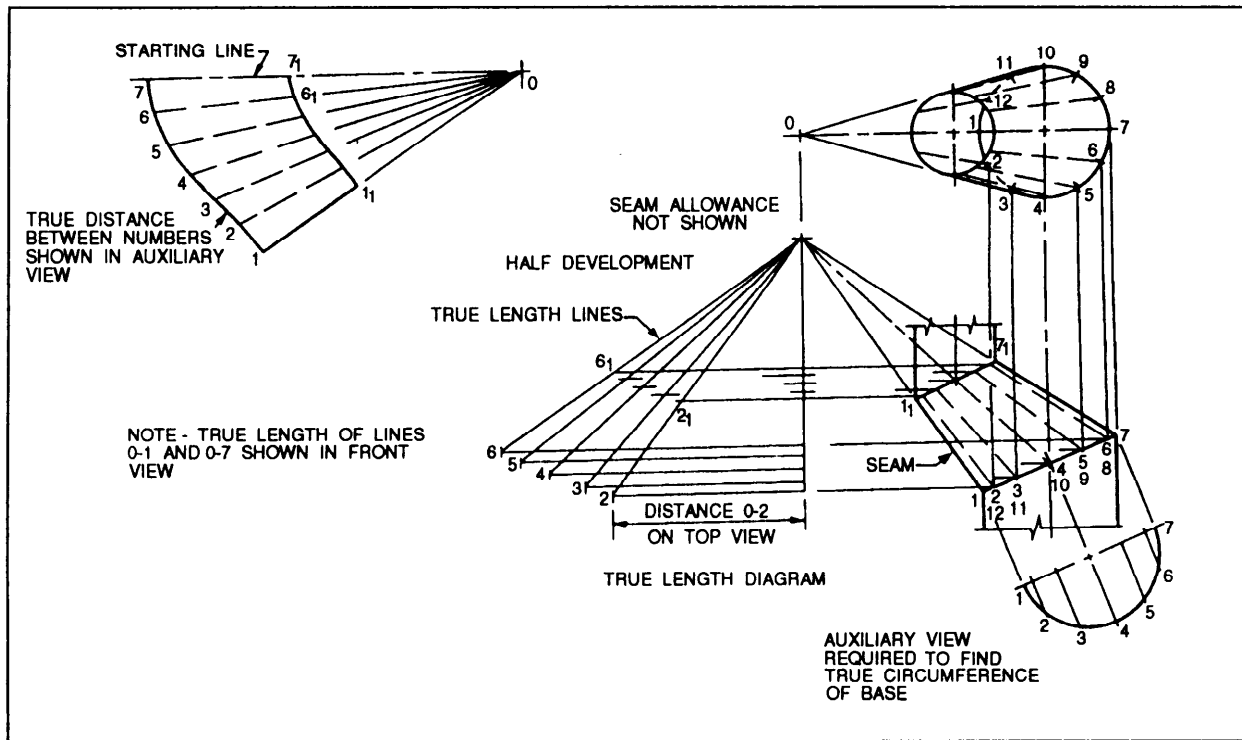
Transition piece connecting two circular pipes—oblique joints.
